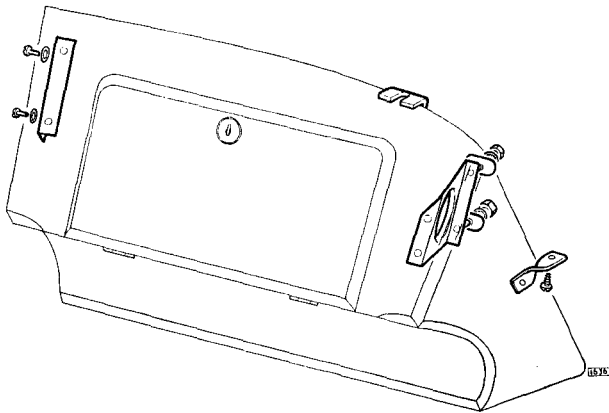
The glove box, showing the three sets of attachment details, the forked bracket in the top edge secures one side of the screen rail.
